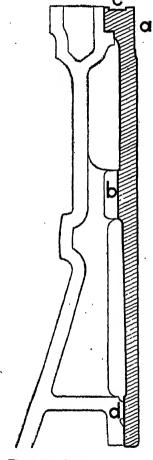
Section of Liner for Four-cycle Engine, showing Method of Jointing and Staying.
